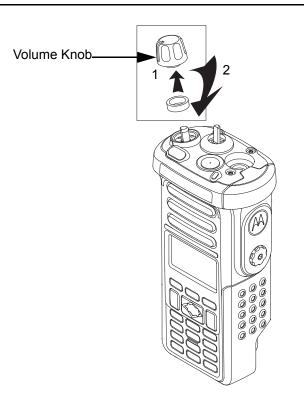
Align D-shaped part of the shaft with the D-shaped hole
